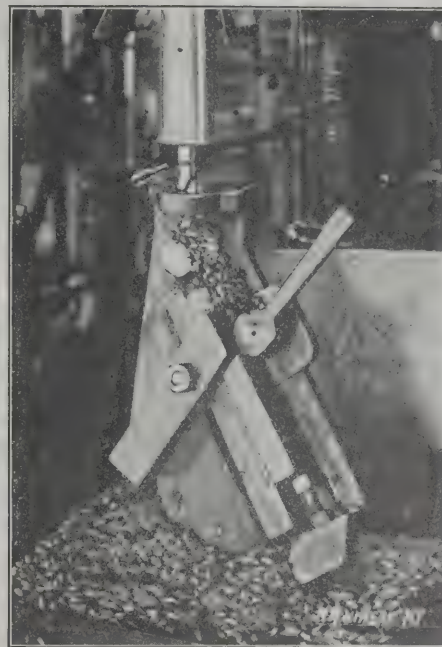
Simple Form of Chuck for Drilling the Cutter Hole in Off-set Tool-holders
